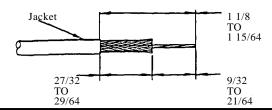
Immersion Resistant and Standard Solder Sleeve Installation (Sheet 3)
